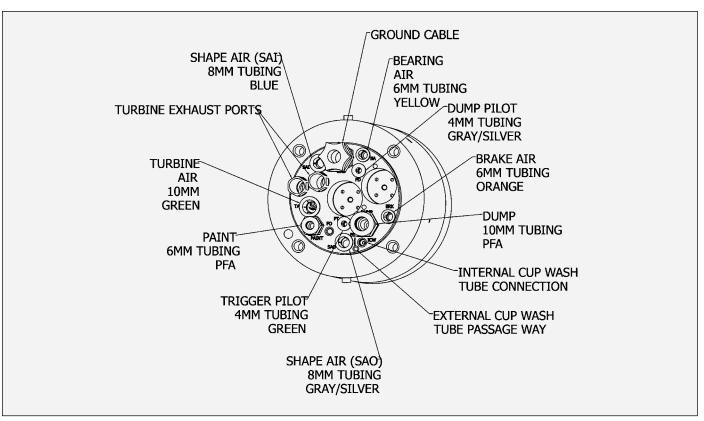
Installing Atomizer Body Assembly Onto Atomizer Extension
